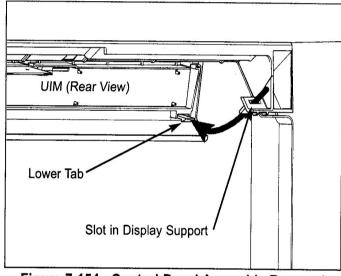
Control Panel Assembly Removal (viewed from behind)
